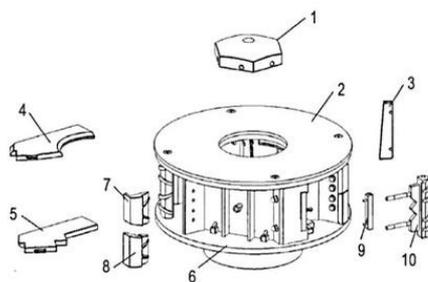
Construction of the centrifugal crusher rotor: 1- distributor partition, 2- rotor body plate, 3- plate guide, 4- upper plate, 5- lower abrasion-resisting plate, 6- body, 7,8- hammer assembly, 9- spare bit, 10- rotor bit assembly
